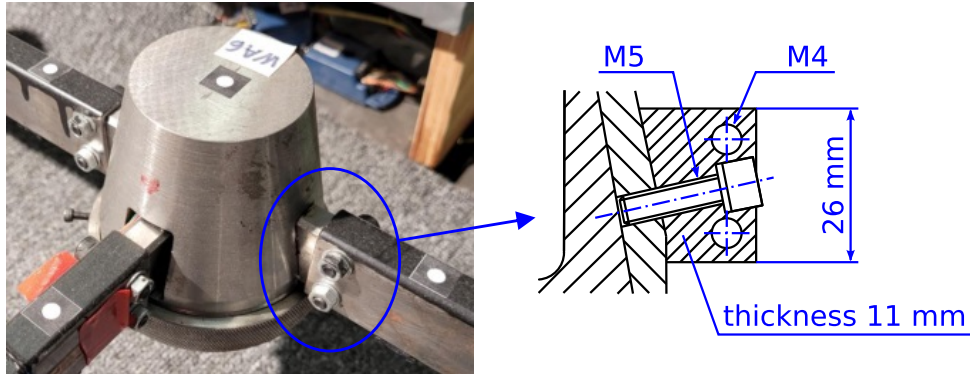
Details of the bolted connection between lockable joint and beam [153]
